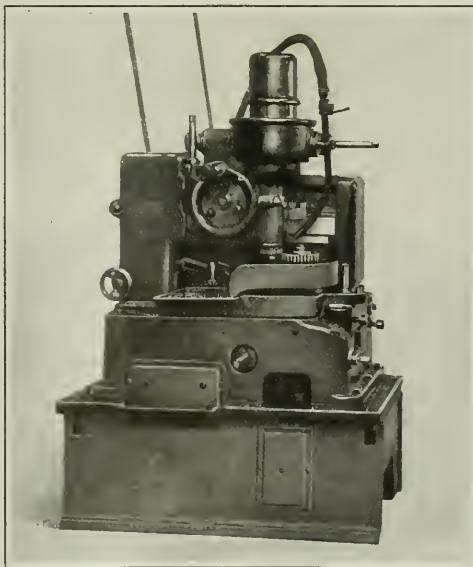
High-speed Gear Shaper made by Fellows Gear Shaper Co.
